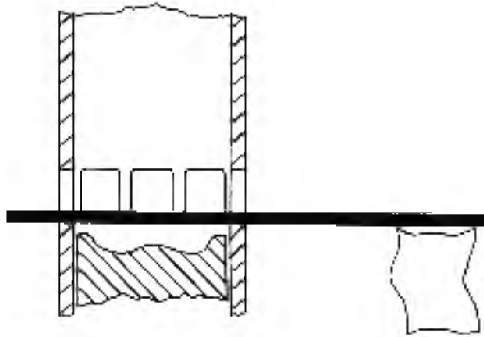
"Stop-Bar" Inserted Through Cylinder Ports
